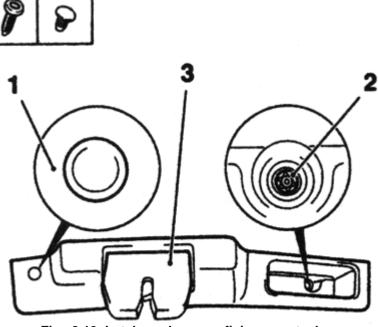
Latch and screw fixing on-stack castle Doors back of:
